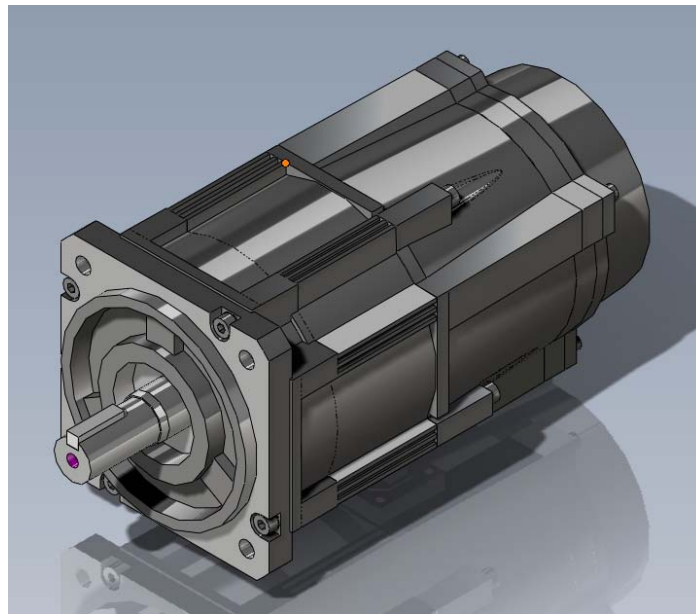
SolidWorks model of an SGMGV-05 motor with a brake and oil seal.
